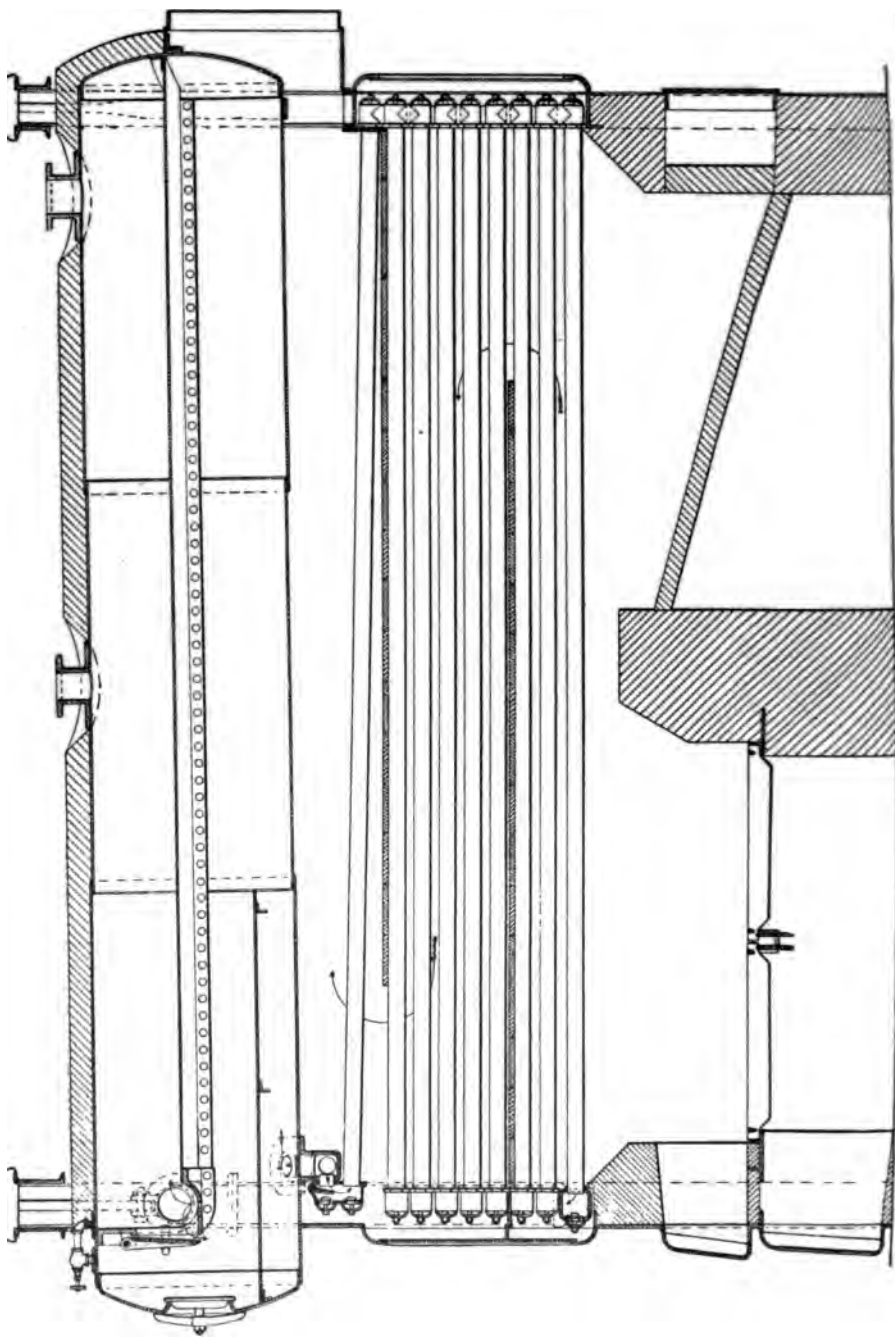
SECTIONAL VIEW OF MACHINERY - FROM LINEAR POSITION.
